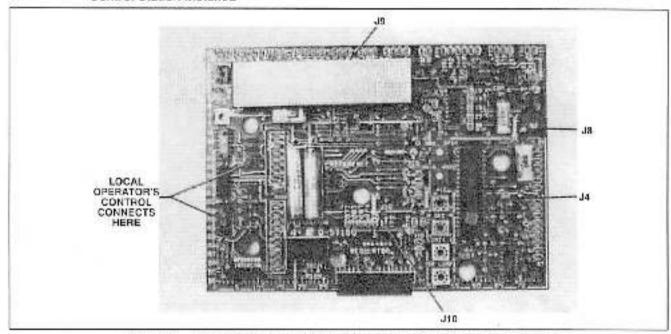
Three Phase MinPak Plus Regulator Board Jumper Location
